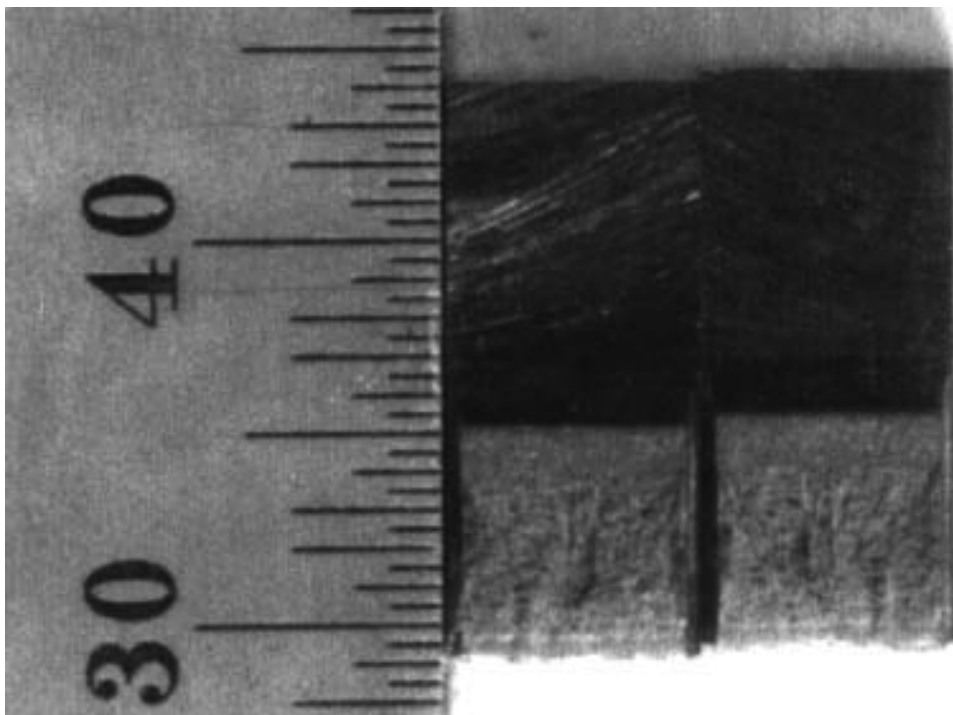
Fracture surface of specimen L20-B tested at 288°C
